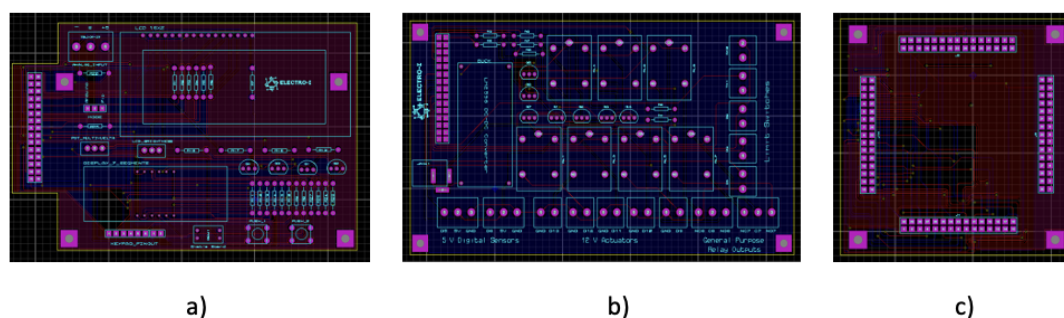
PCB designs of the expansion modules: (a) human-machine interface module, (b) power and actuator control module, and (c) interconnection module.
